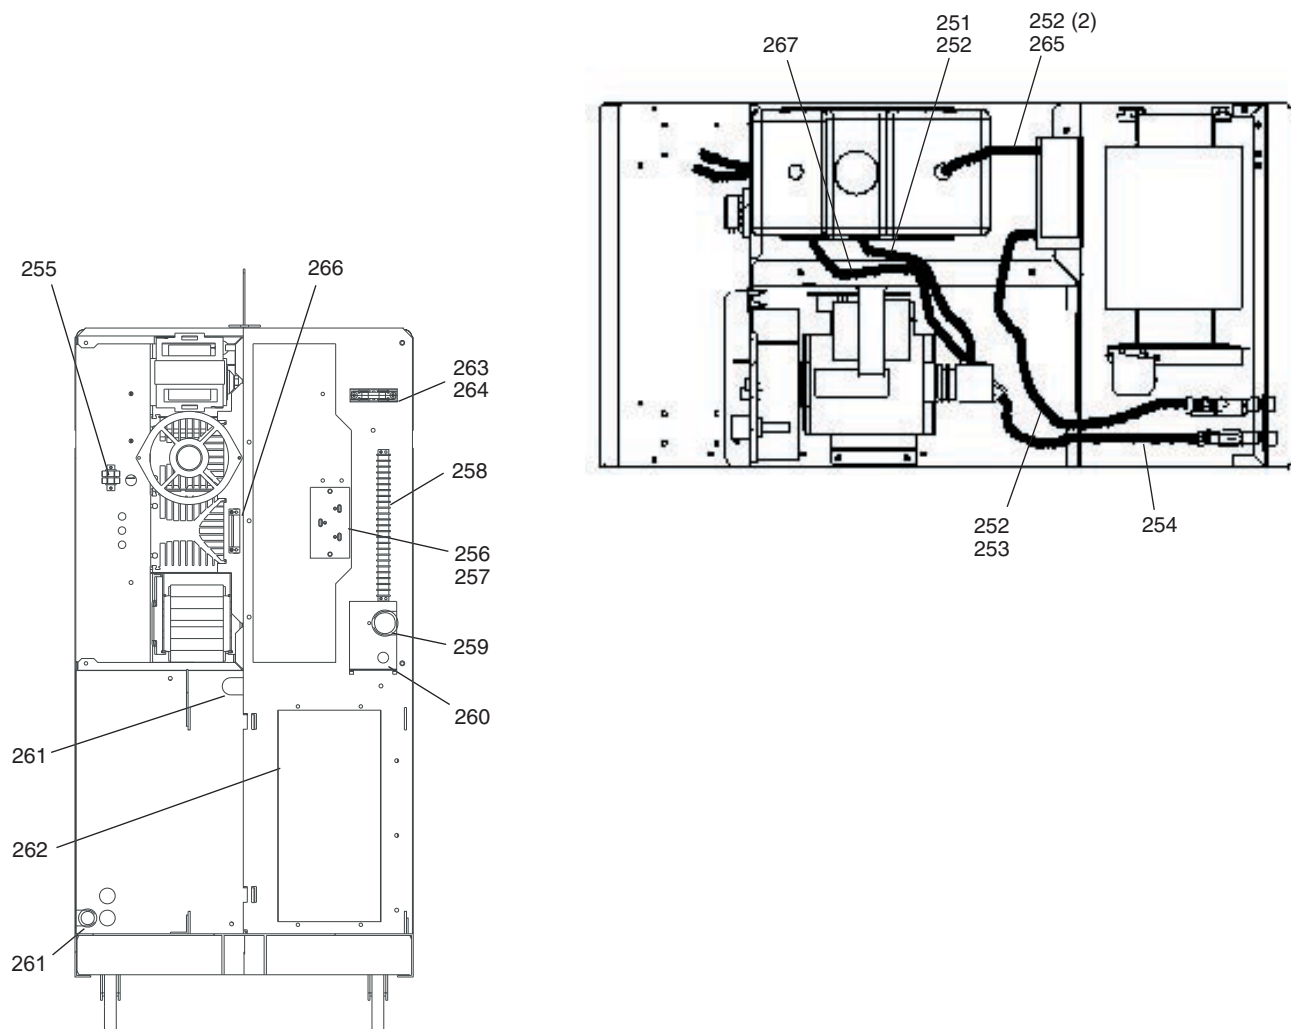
G. Power Source, Front View, Top View (Cover Removed)
